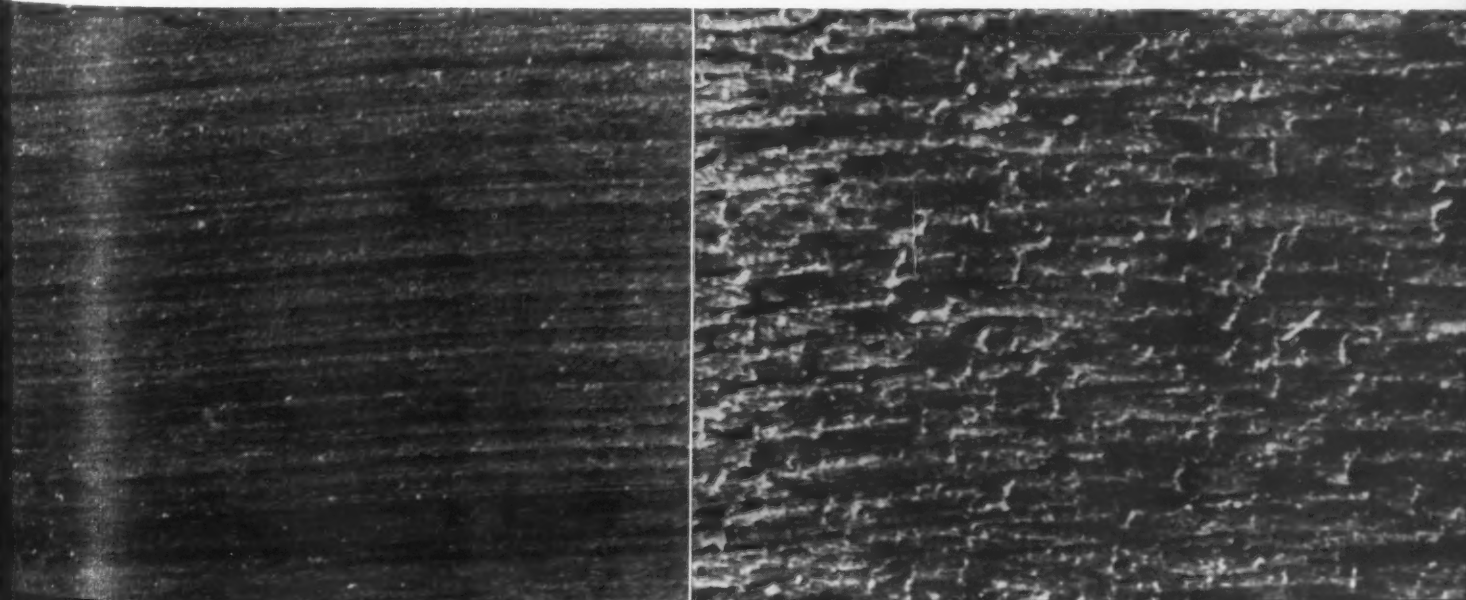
Cemented carbide tip after machining steel at 2140 fpm cutting speed. Depth of cut, 0.150 in., chip thickness, 0.010 in.
